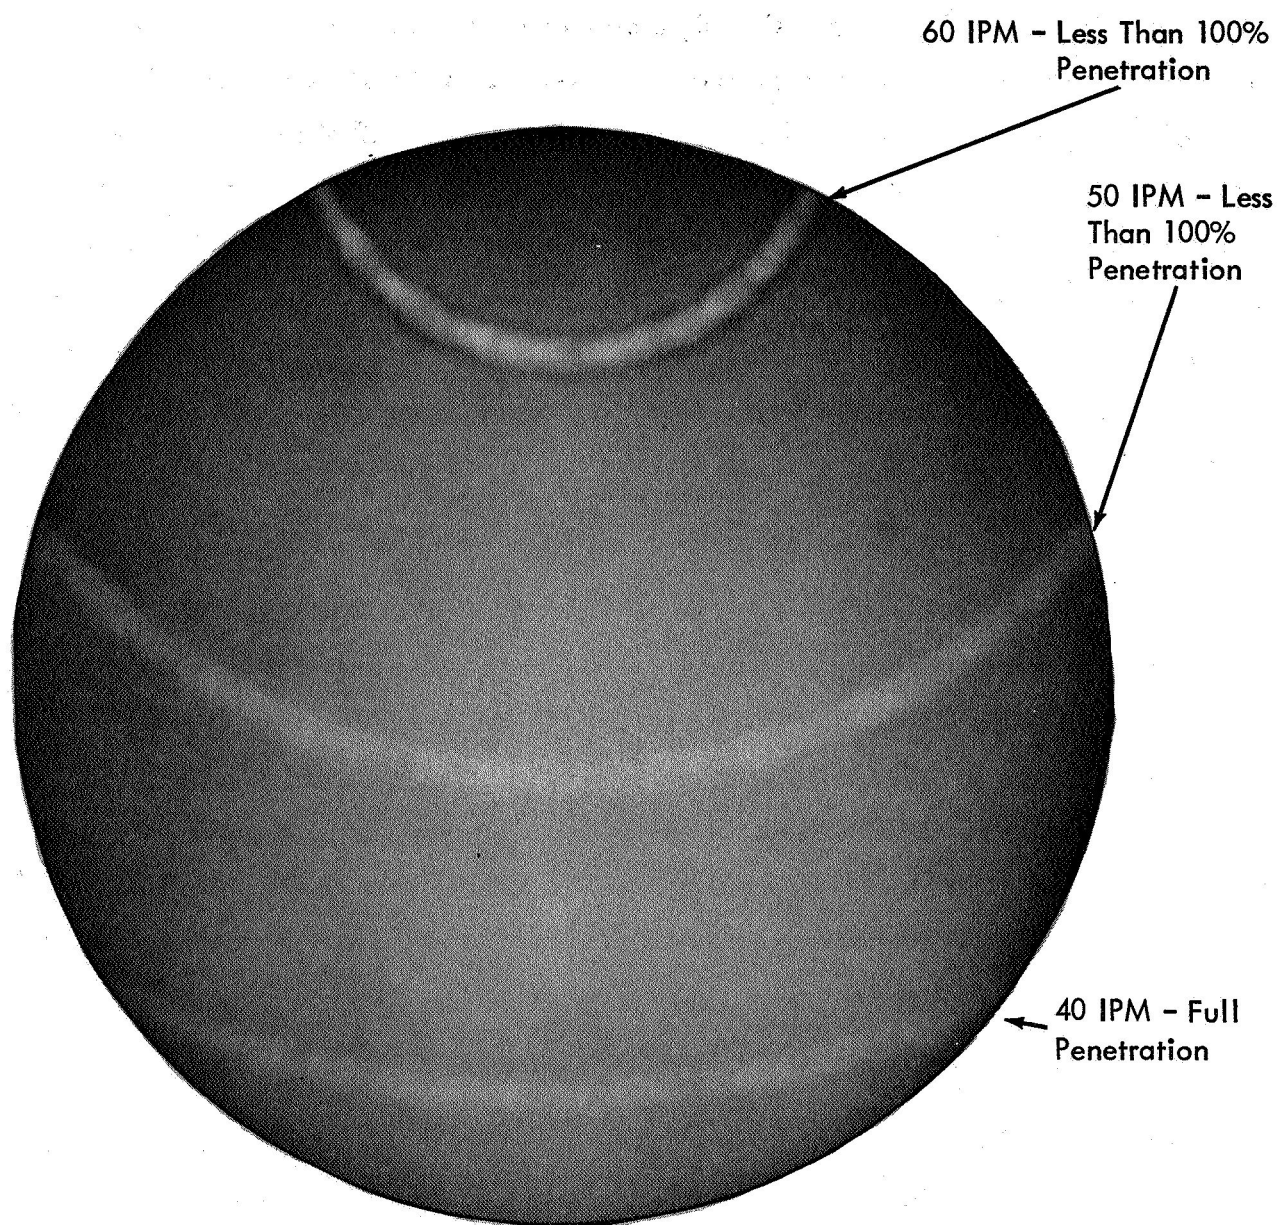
Vacuum Electron Beam Welds Produced with the Out-of-Vacuum Welder
